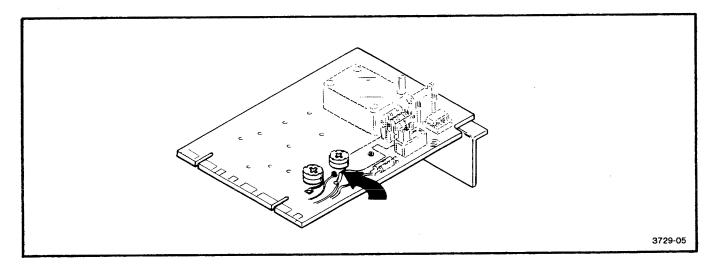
Breakpoint for Kelvin sensing return path. The solder pad is to the left on the run.
